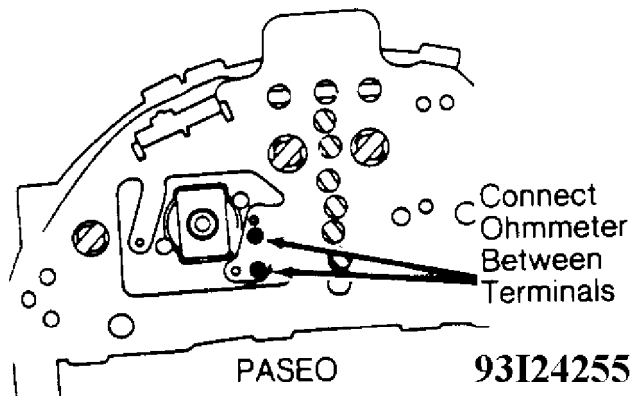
Checking No. 1 Speed Sensor (Paseo)
